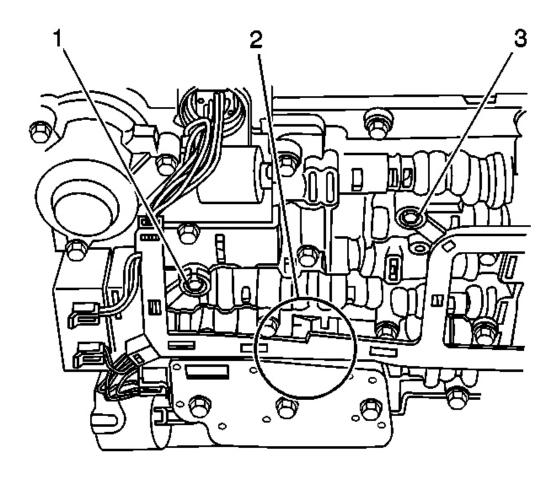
View Of Tab Between Valve Body & Pressure Switch Courtesy of GENERAL MOTORS CORP.
